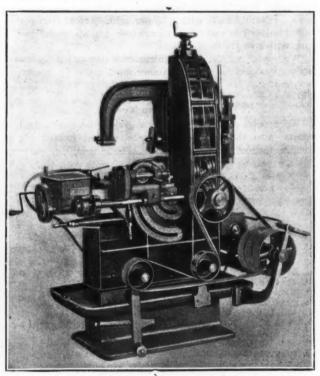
A View of the Opposite Side of the No. 2B Gear Cutter, Showing the Drive.
